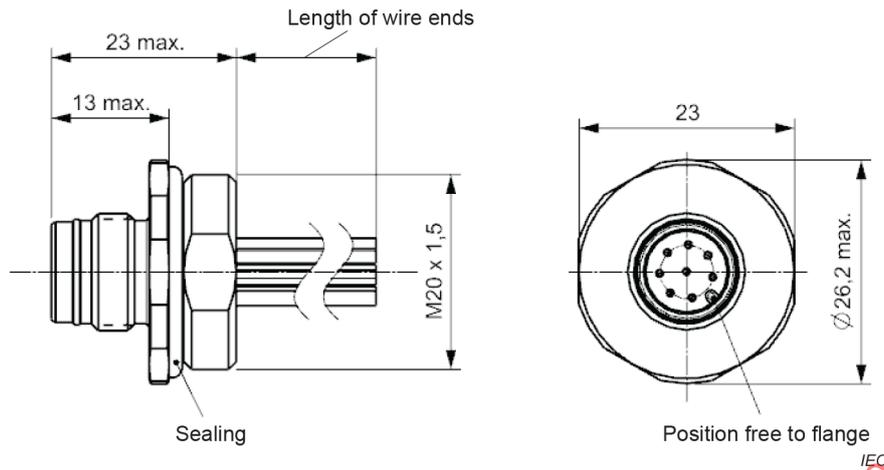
Fixed connector, male contacts, mounting with thread M12 × 1 and outer push-pull locking, with wire ends, single hole front mounting thread M20 × 1,5
